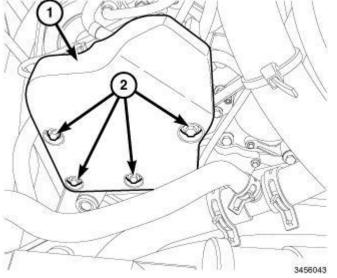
High Pressure Pump Blocker Shield & Bolts Courtesy of CHRYSLER GROUP, LLC
